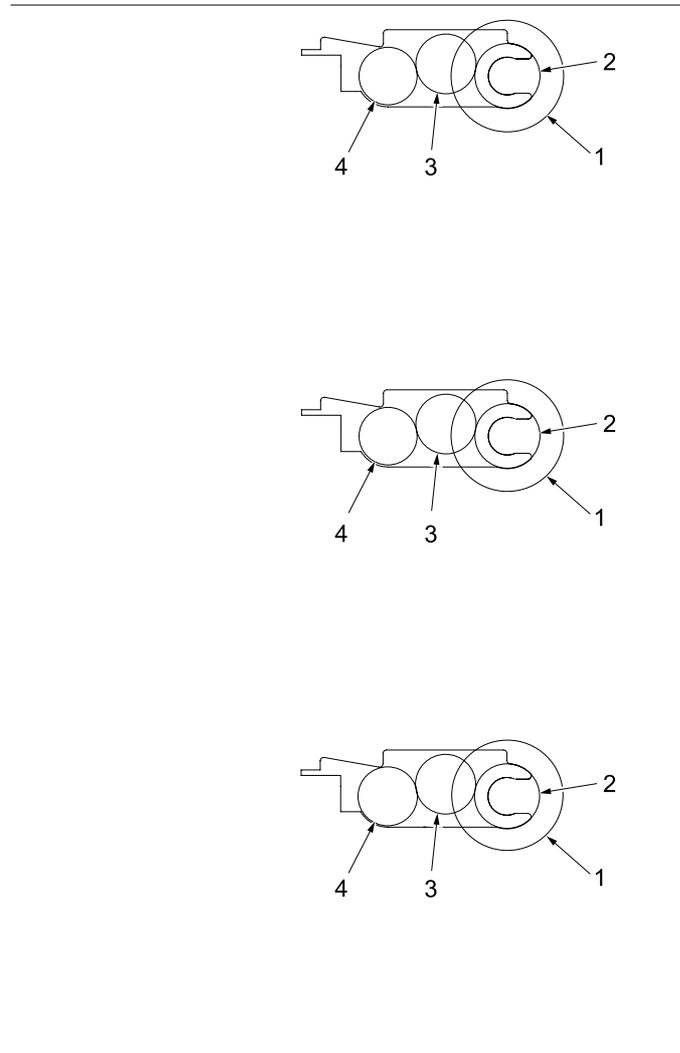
Drive system 1 (primary paper feed unit)
